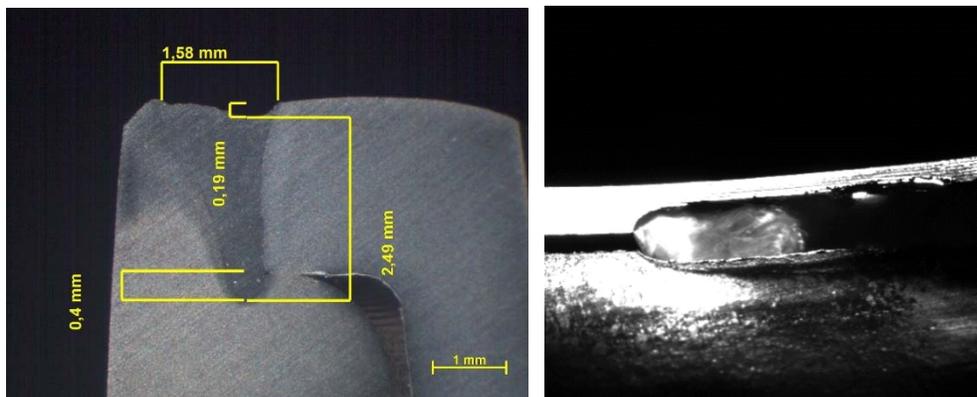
CleanWeld setup to weld components with gaps of up to 0.3 mm without filler wire in a very calm welding process.
